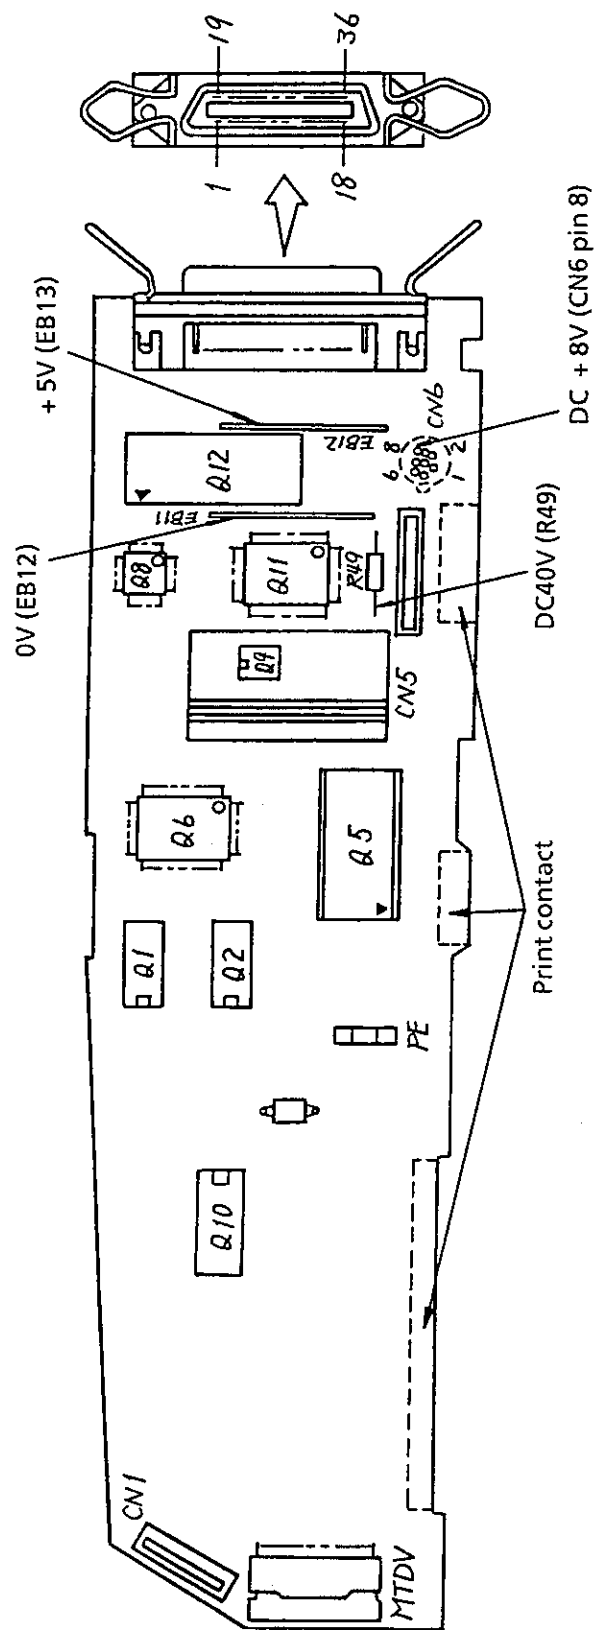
Check points on the control printed circuit board (SKRA Rev.11)
